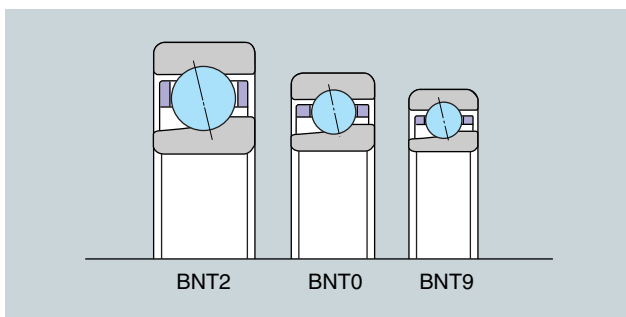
High-speed angular contact ball bearings for grinding machines/motors
